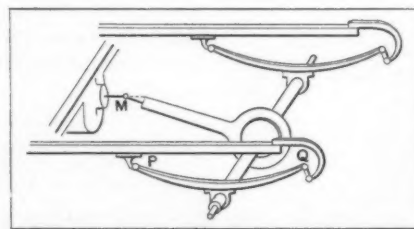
Perspective view of Fig. 3 showing the displacement of the entire axle
